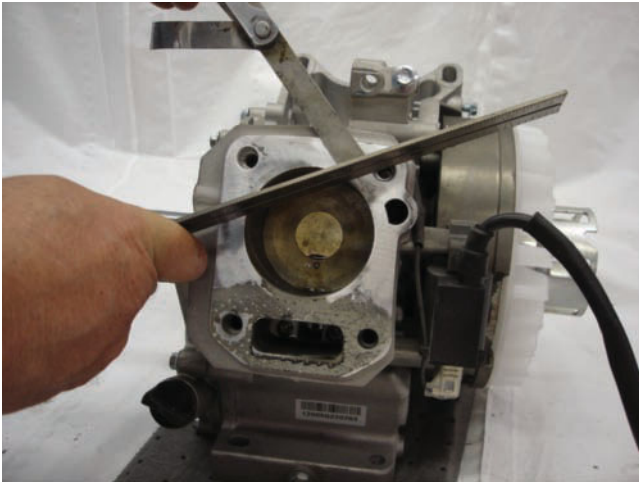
Checking the cylinder for warpage using a feeler gauge and straightedge.
